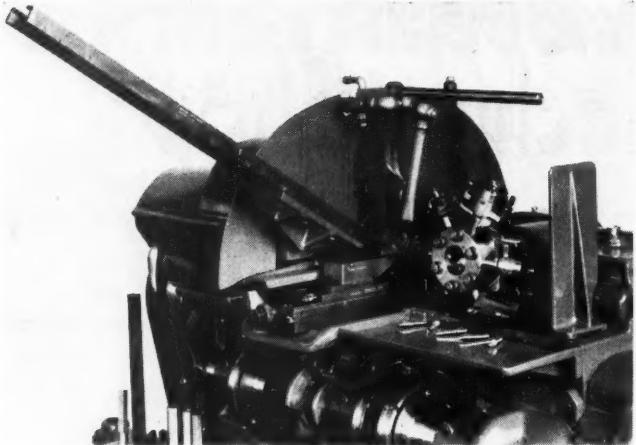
Chute-Type Magazine Attachment for Second-Operation Work, Mounted on a B & S Automatic Screw Machine
